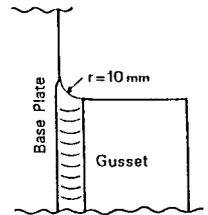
Schematic View of Ground Weld Toe at Gusset End.
